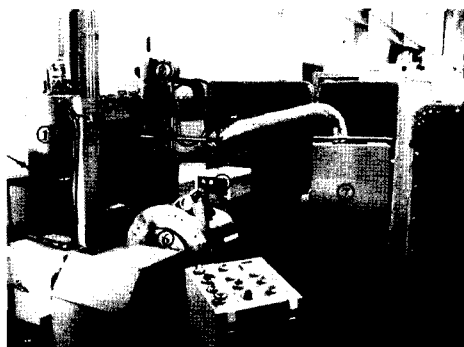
Experimental setup of GMA welding for the wear resistance of contact tip wear resistance test
